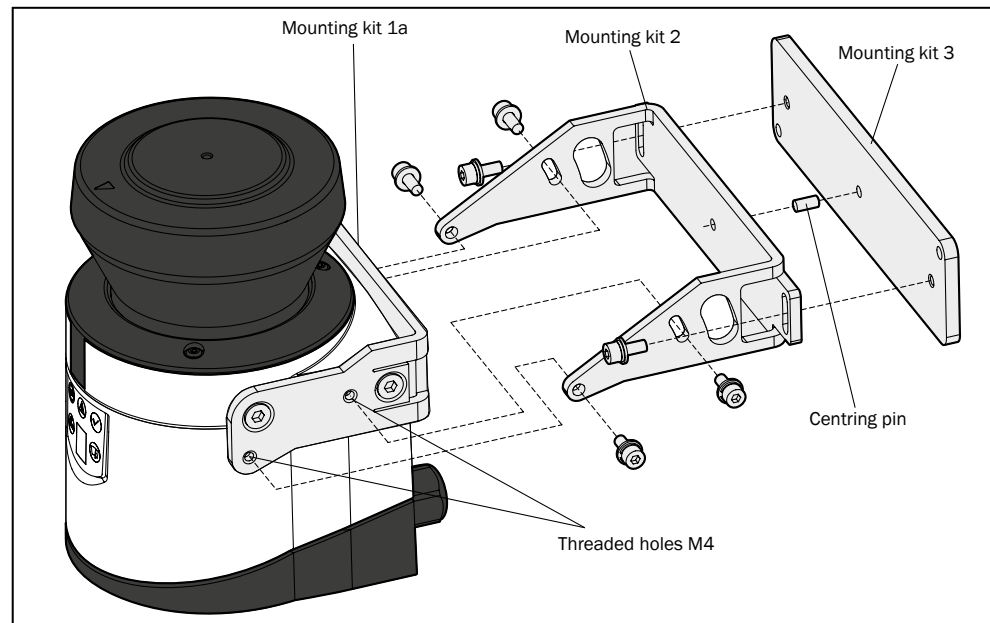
Mounting with mounting kit 2 (part no. 2039302) and kit 3 (part no. 2039303)
